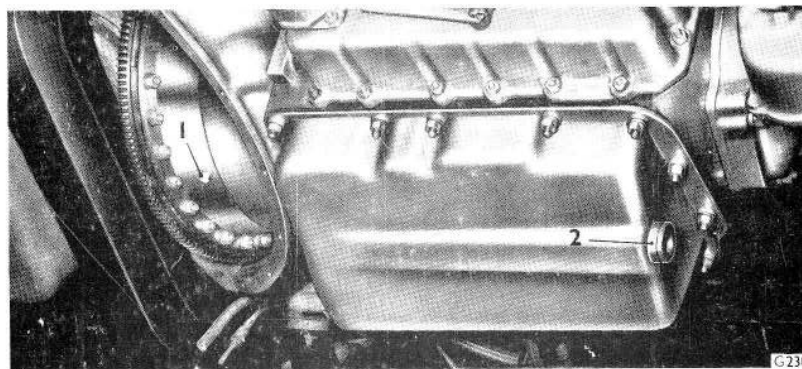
GEARBOX AND FLUID COUPLING DRAIN PLUGS
